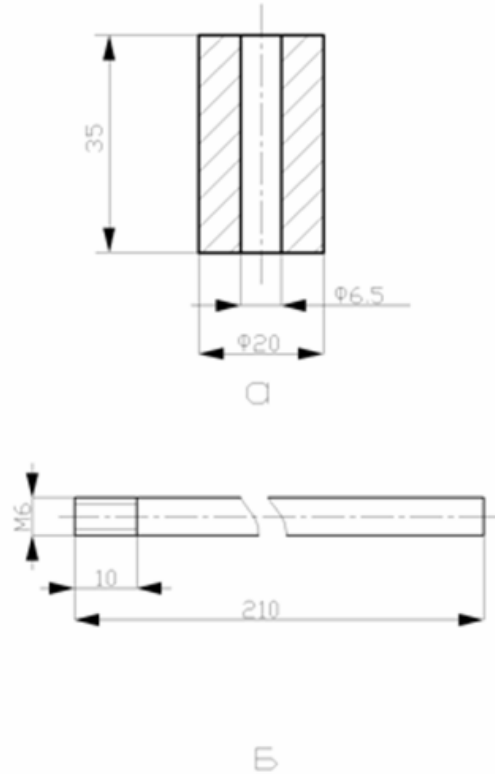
Geometrical dimensions of weight (a) and rod (b) of the cross-shaped pendulum of Oberbeck's pendulum
